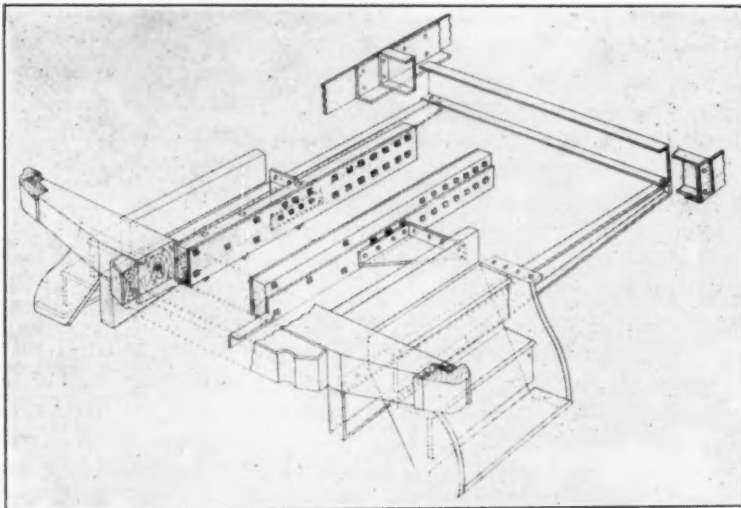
SKELETON OF PLATFORM MEMBERS, STEEL AND WOOD CONSTRUCTION
